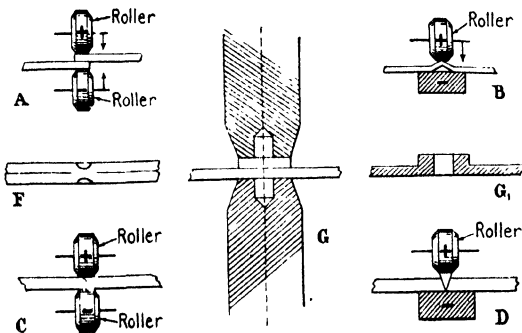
TYPES OF ELECTRODES FOR SEAM WELDING.
